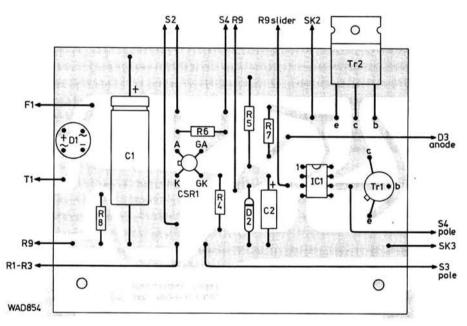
The component placement drawing showing the positions of the components on the printed circuit board
